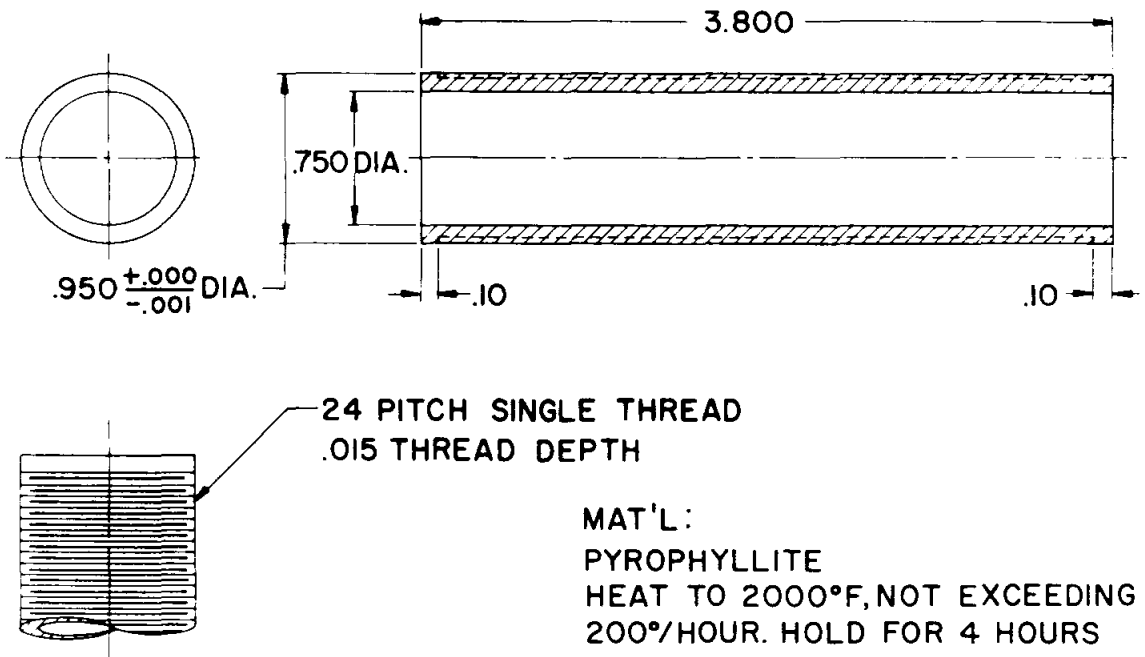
Drawing showing furnace heater core. Dimensions are in inches.
